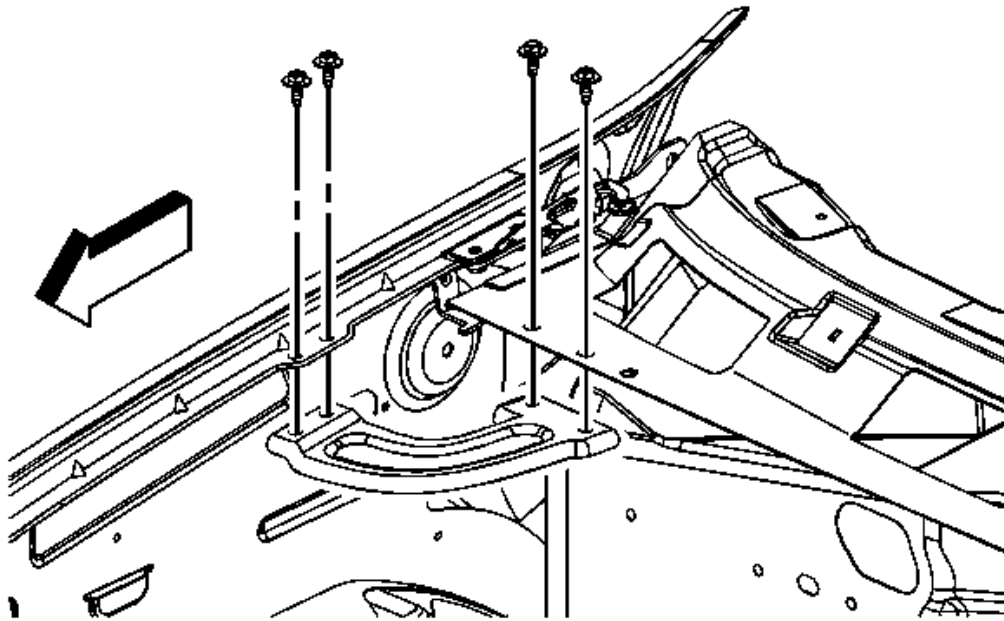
View Of Front Fender Rear Upper Brace & Bolts
